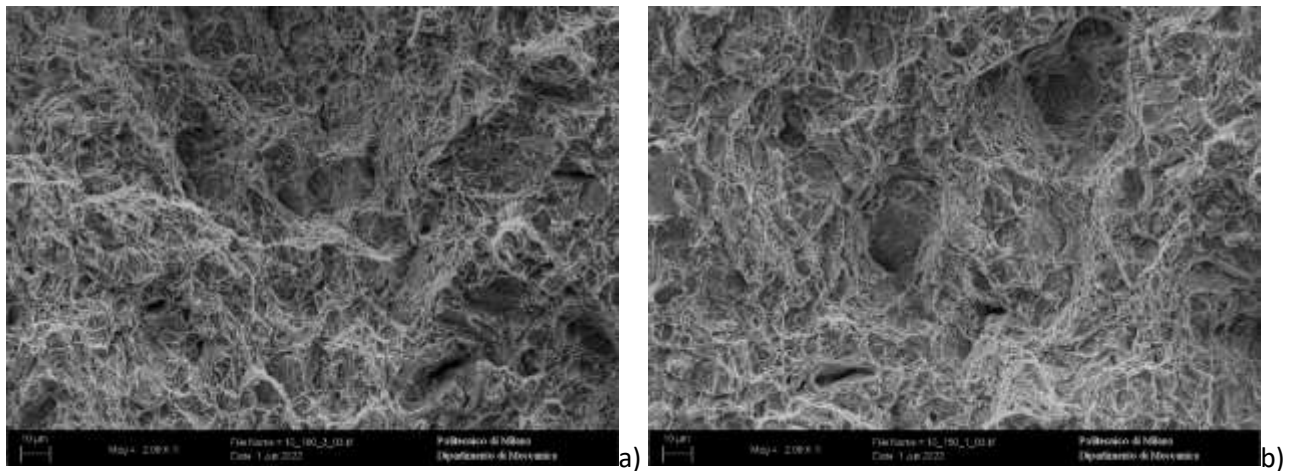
Fracture surfaces of 10 mm diameter samples. 100°C, 3h – The fracture surface is almost completely ductile (a), 150°C, 1h – The fracture surface is almost completely ductile (b).
